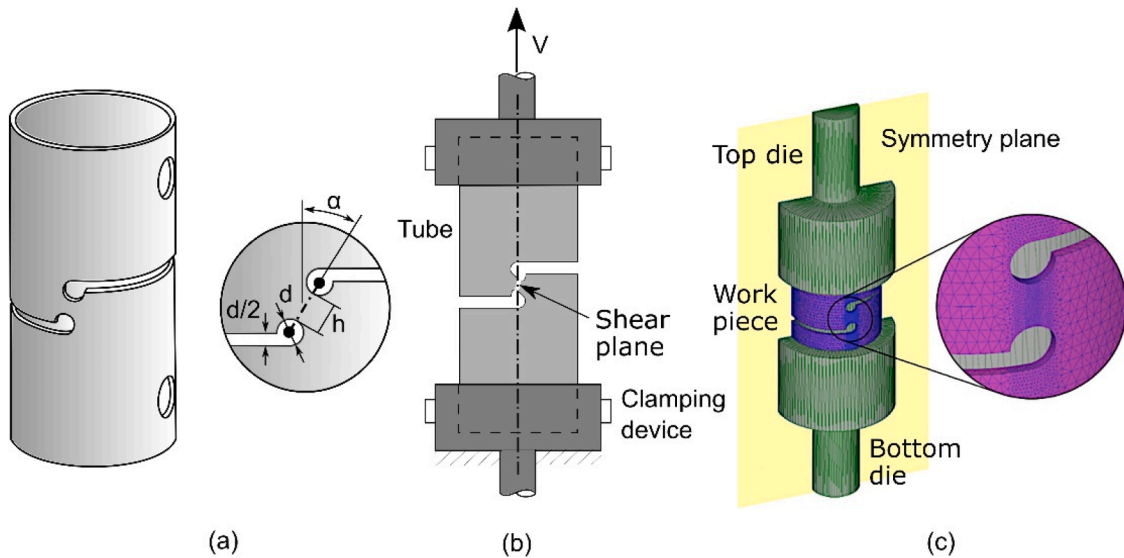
(a) Schematic representation of the shear test by tension or STT, (b) front view indicating the shear zone and clamping device and (c) numerical model of the STT carried out using DEFORM-3D™.
